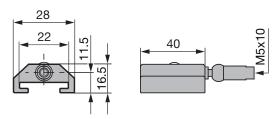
Installation dimensions of BTL5-T-2814-1S magnet
